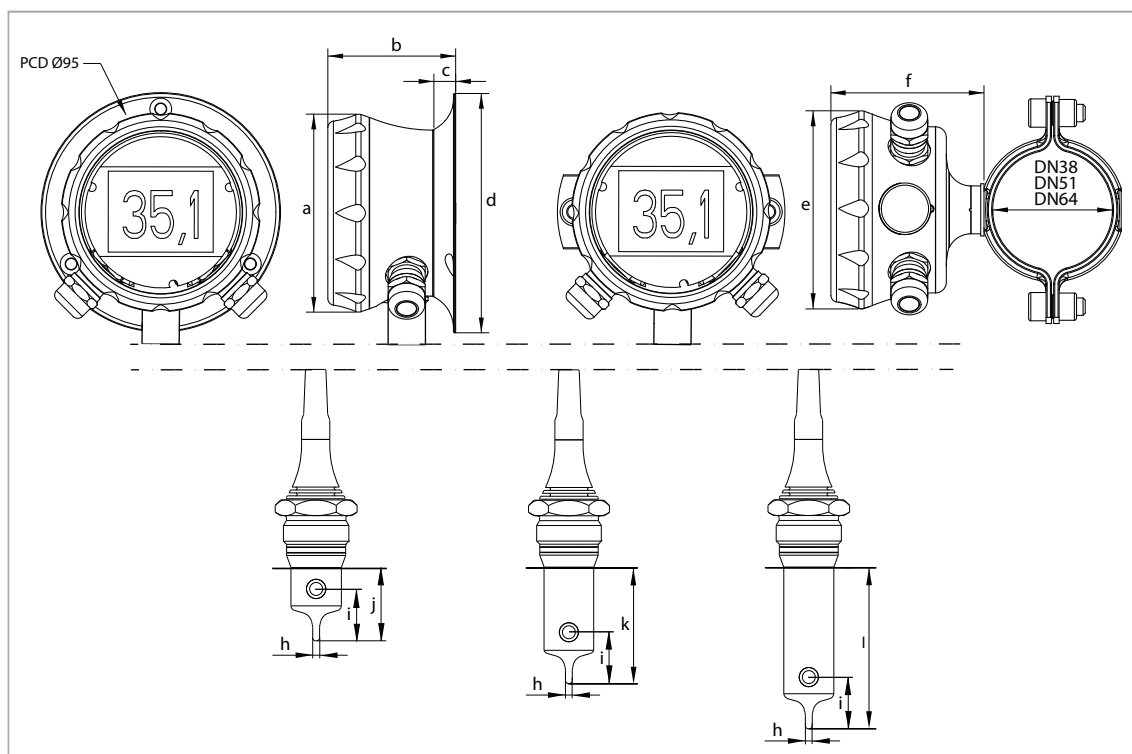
Dimensions remote version for wall mounting and pipe mounting
